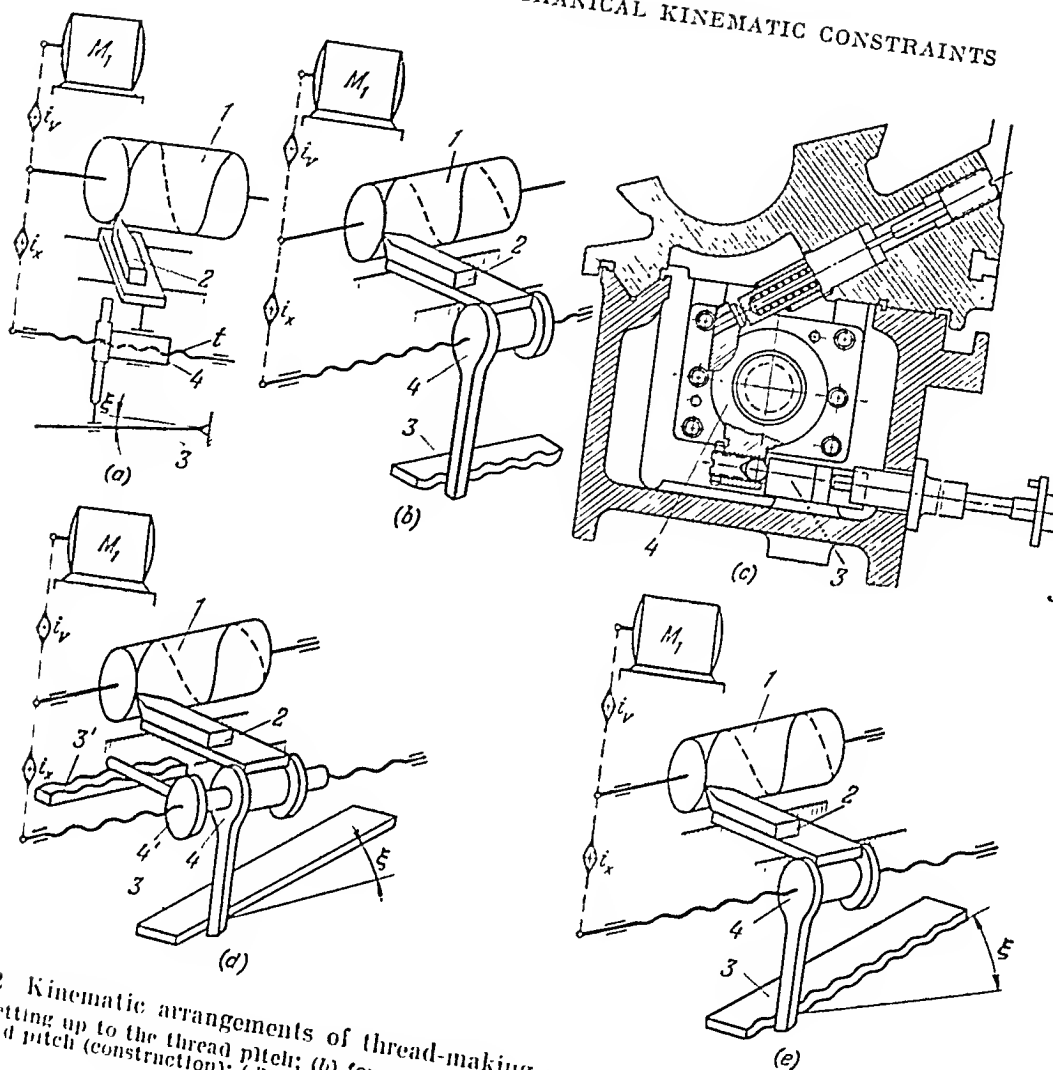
Kinematic arrangements of thread-making machines having a correction bar:
